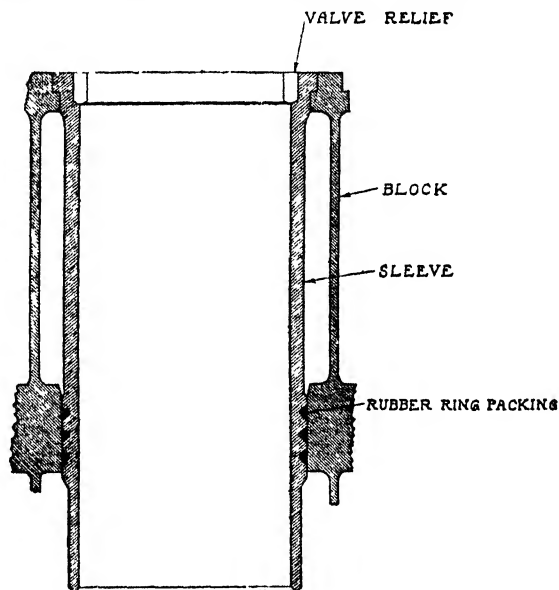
The Wet Type of Cylinder Liner, showing method of making Water Joint.
